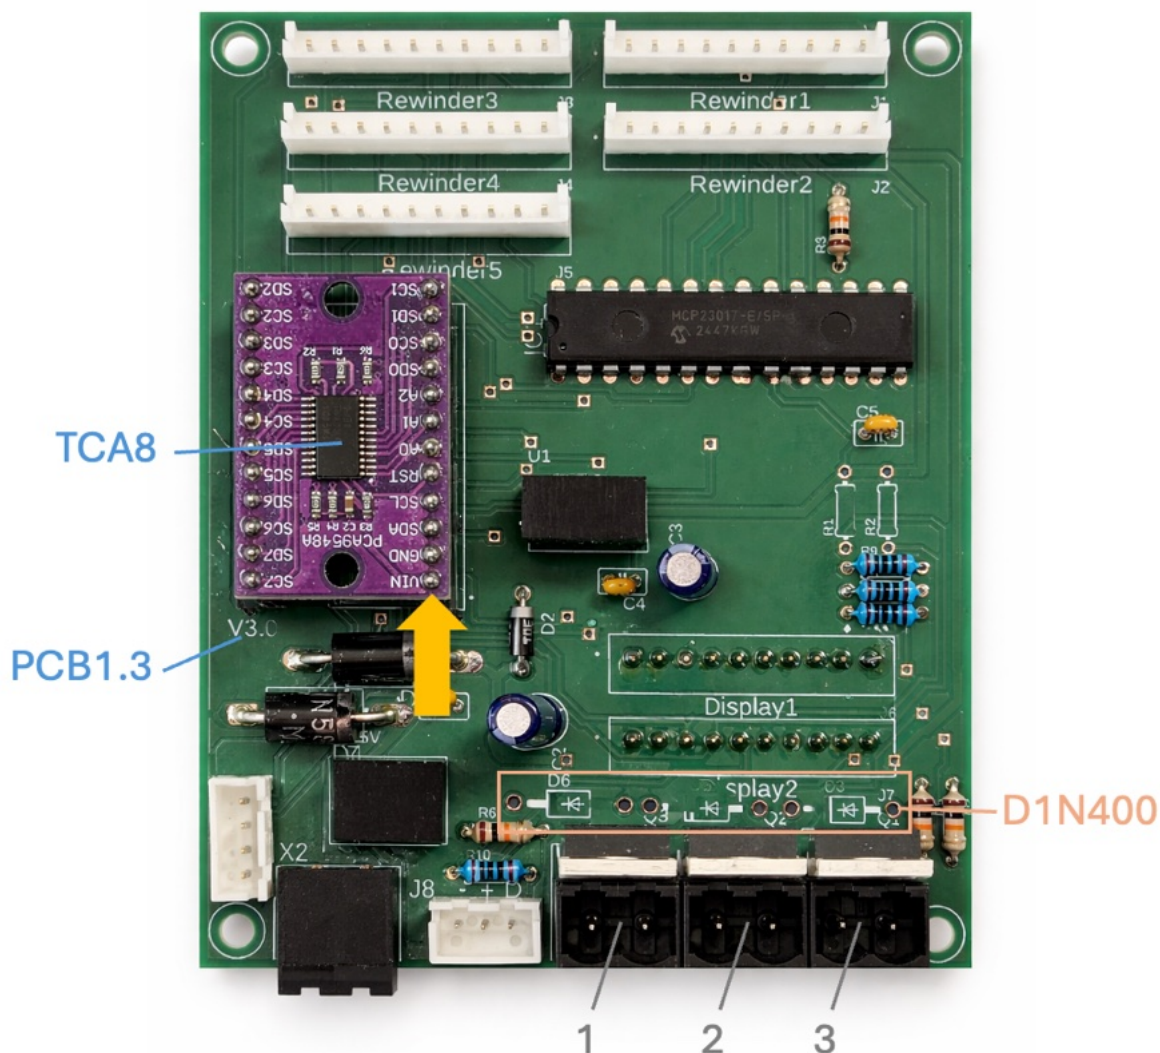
Mainboard PCB1.3 (V3.0) Step 2.
